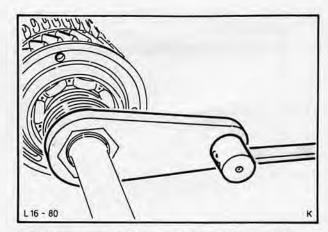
Remove mainshaft nut with Special Tool No. 16-027
